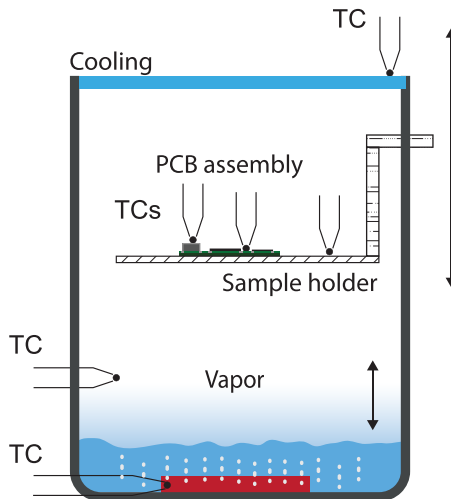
Thermocouple feedback on multiple points of the oven and the assembly.
